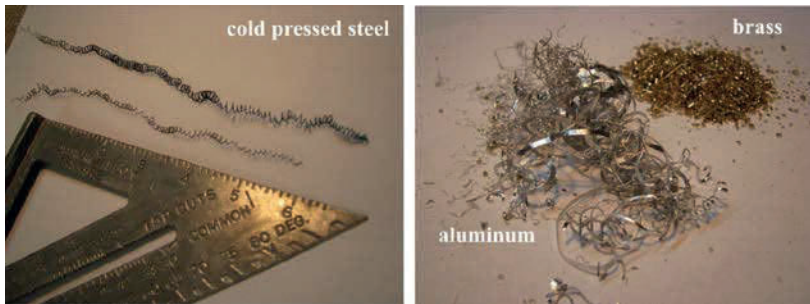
Cut-off chips. Left to right: cold pressed/rolled steel, aluminum, brass. The shape of the chips depends not only on the materials, but also on a large number of other factors including the turning speeds, depth of cut, rake angle of the insert, etc. You can find “chip maps” in engineering books, detailing what turning speed and cutting depth results in the most easy to handle chip type. Here for aluminum and brass a HSS tool was used (and for the steel a brazed carbide cutter), with 2800 RPM and 0.020” (0.0010” for steel) as the cutting depth. The feed rate is difficult to control on a manual lathe. Chip breakers are in use, preventing the chips from wiggling up around the part and blocking the cutting operations. Chip breakers are just geometric features worked into the insert – nothing too exciting. I have been told, however, that production engineers change the materials rather than the cutting conditions to avoid issues with chips
